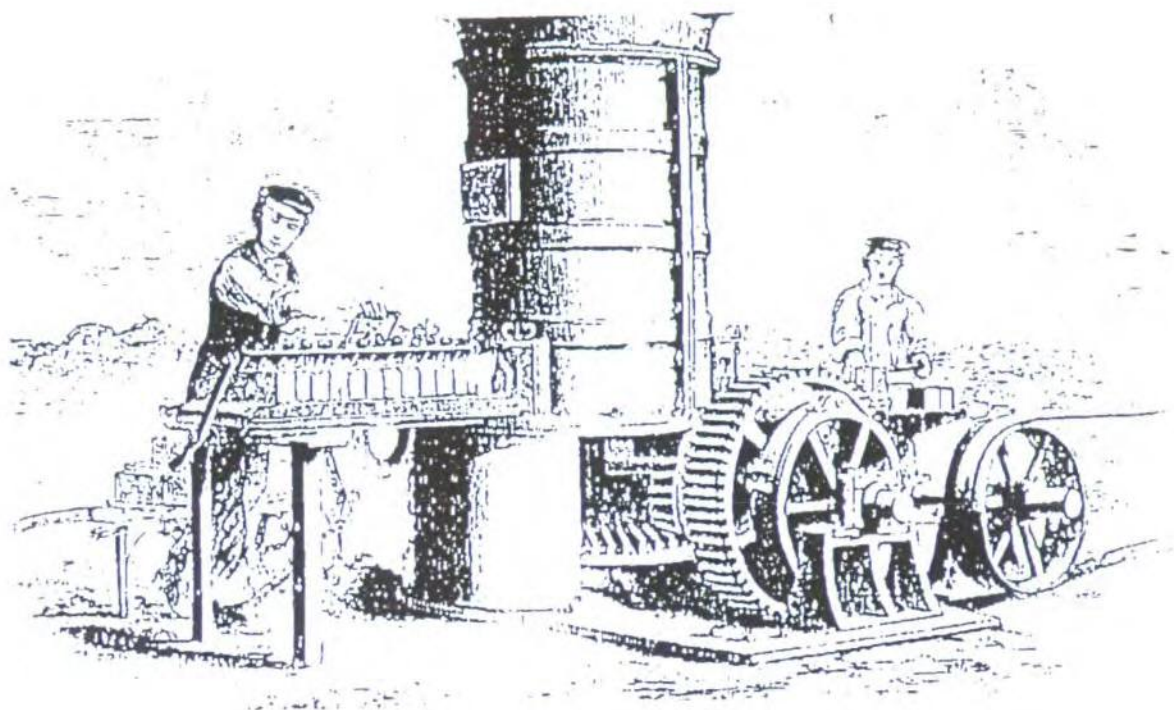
PLATE IX: Bulmer and Sharp steam powered brickmaking machine, 1861.
